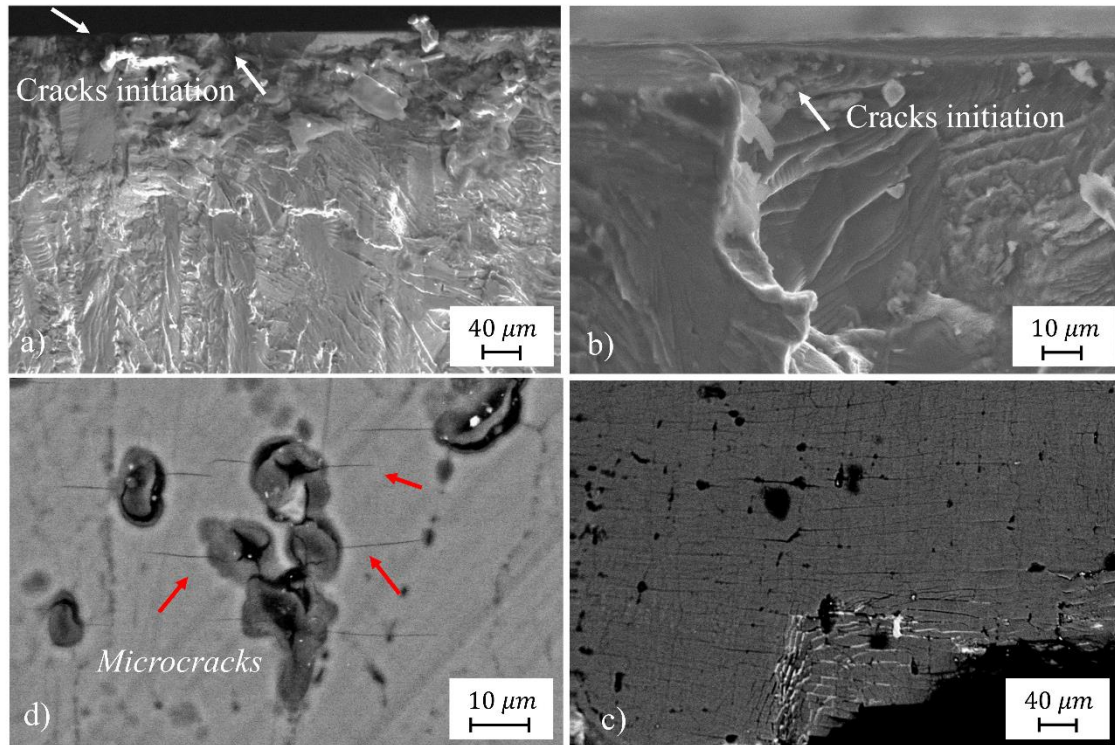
SEM analysis of the fracture surface of the treated sample: a) cross-section of fracture surface in the region of the crack initiation due to defects: crack initiation occurs at the surface. Moreover, fracture surface exhibits cleavage-like fracture. b) crack initiation sites occurred on the surface, c) longitudinal section of fracture surface showing defects with angular morphology that act as stress concentrations points, resulting in areas with micro-crack formation and d) magnification of the fracture surface showing the presence of the voids at the vertices of which the micro-cracks occur.
